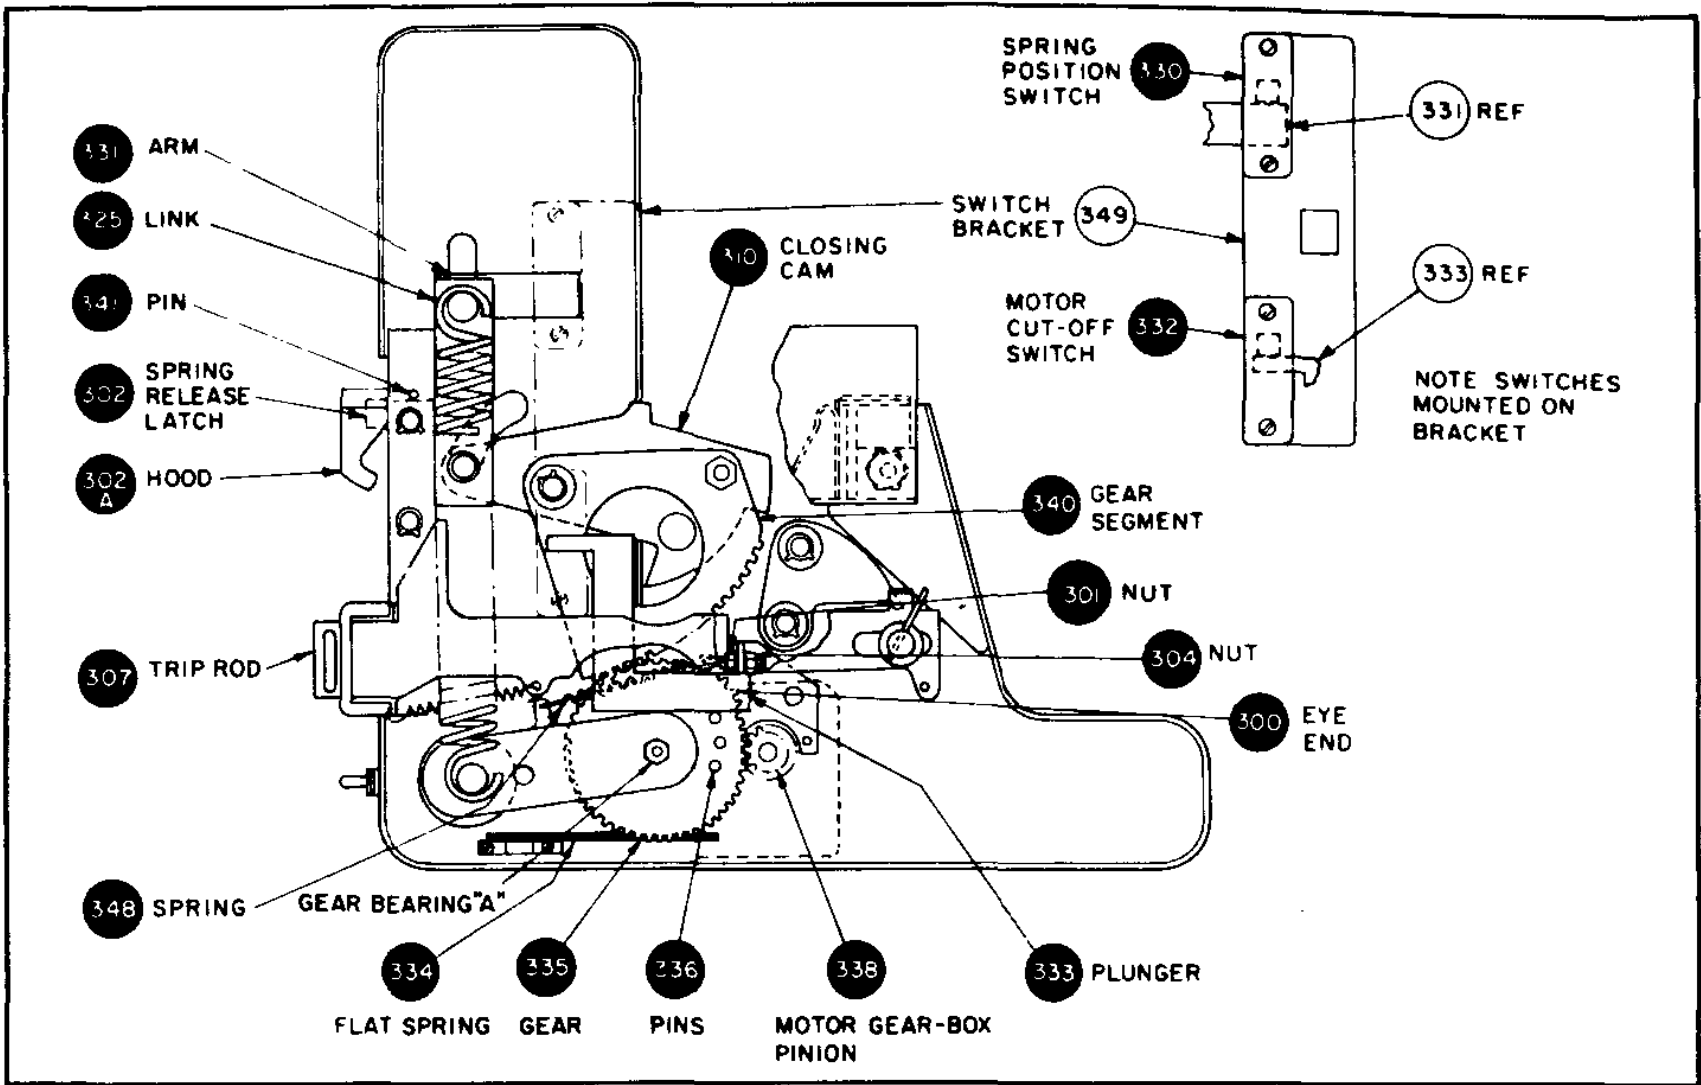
Typical Operating Mechanism - Electrically Operated Breaker
